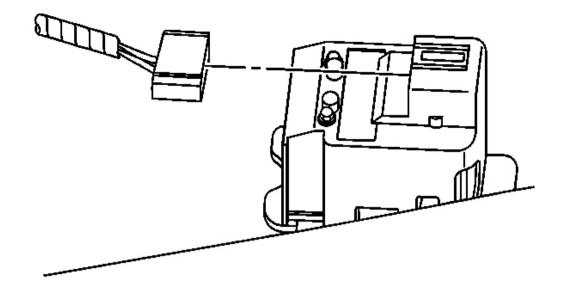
Electrical Connector & Inside Air Temperature Sensor Courtesy of GENERAL MOTORS CORP.
